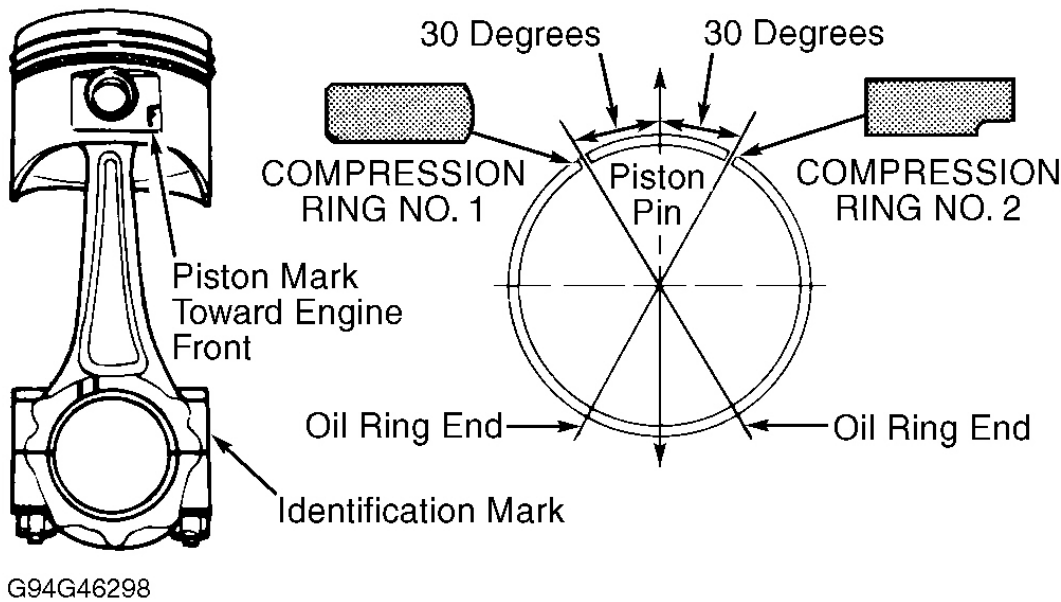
Locations & Marks For Assembling Pistons, Rod & Rings
